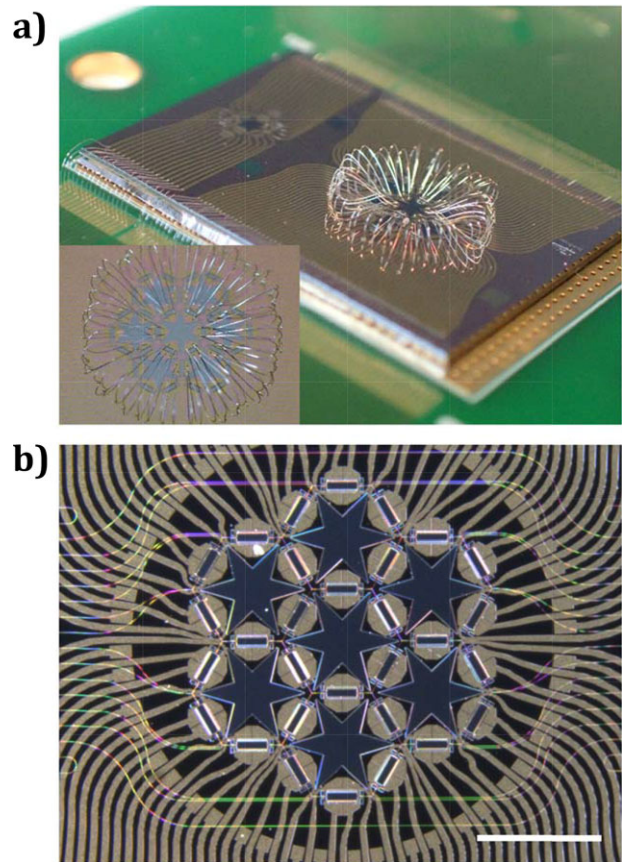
a) $15 \times 20\text{ mm}^2$ chip mounted on a printed circuit board (PCB) of footprint $120 \times 60\text{ mm}^2$ and (inset) top-view of the wire-bondings. b) Zoomed view of the fabricated 7-hexagonal mesh. The scale bar is equivalent to 2 mm.
